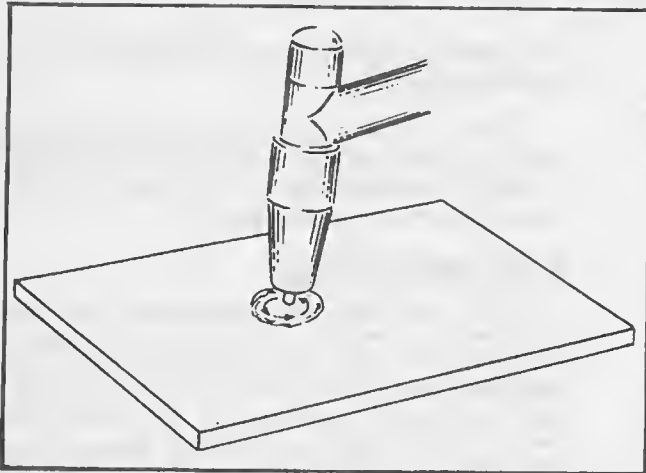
Forming a Molten Puddle with a HELIARC Torch
